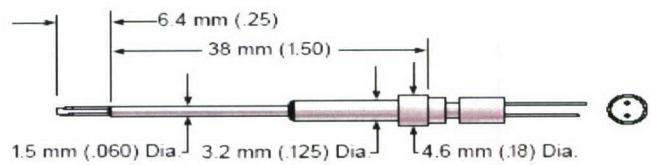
Dimensions of TSI Hot Wire Probe (Model 1260A)
